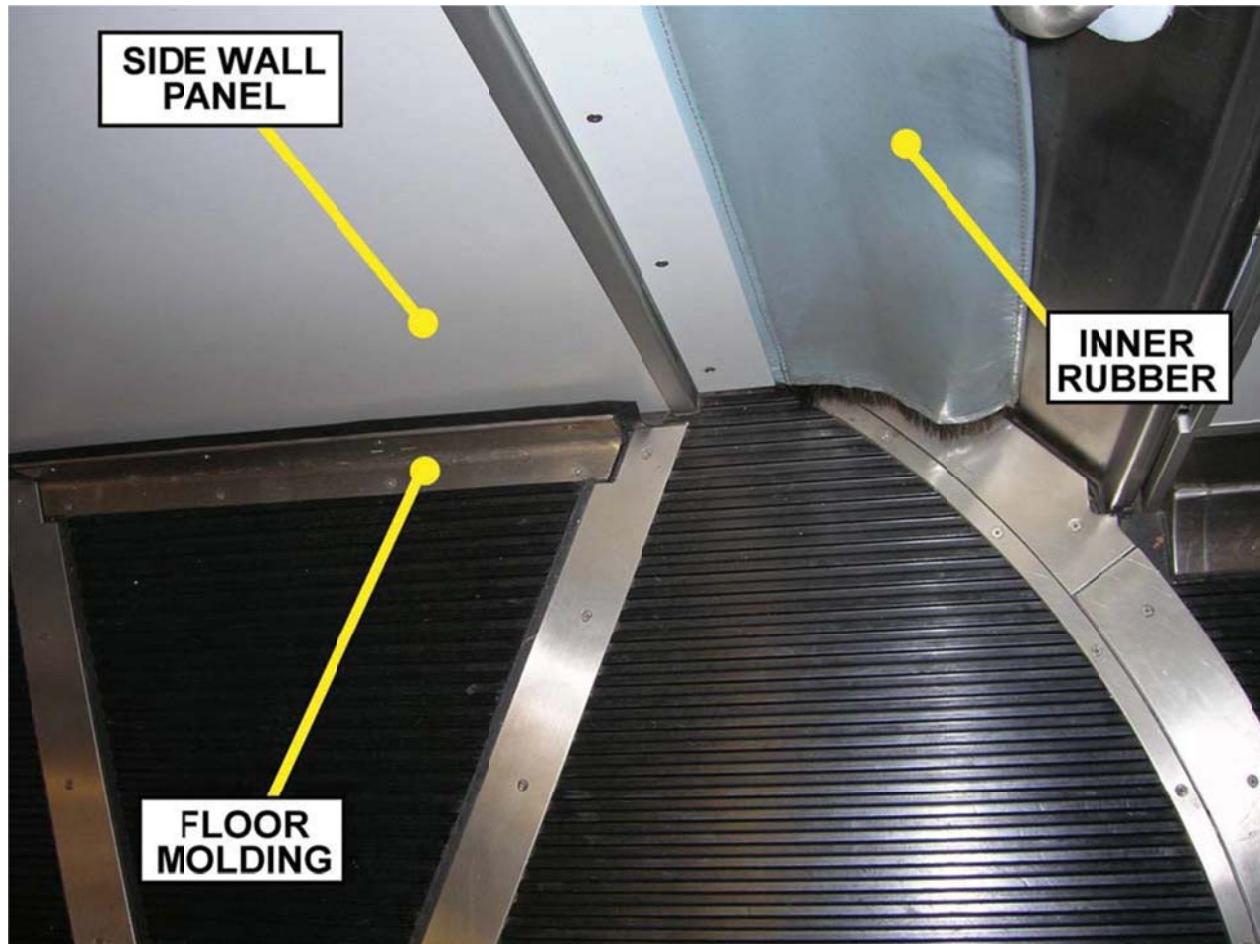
FLOOR MOLDING & SIDE WALL PANEL
